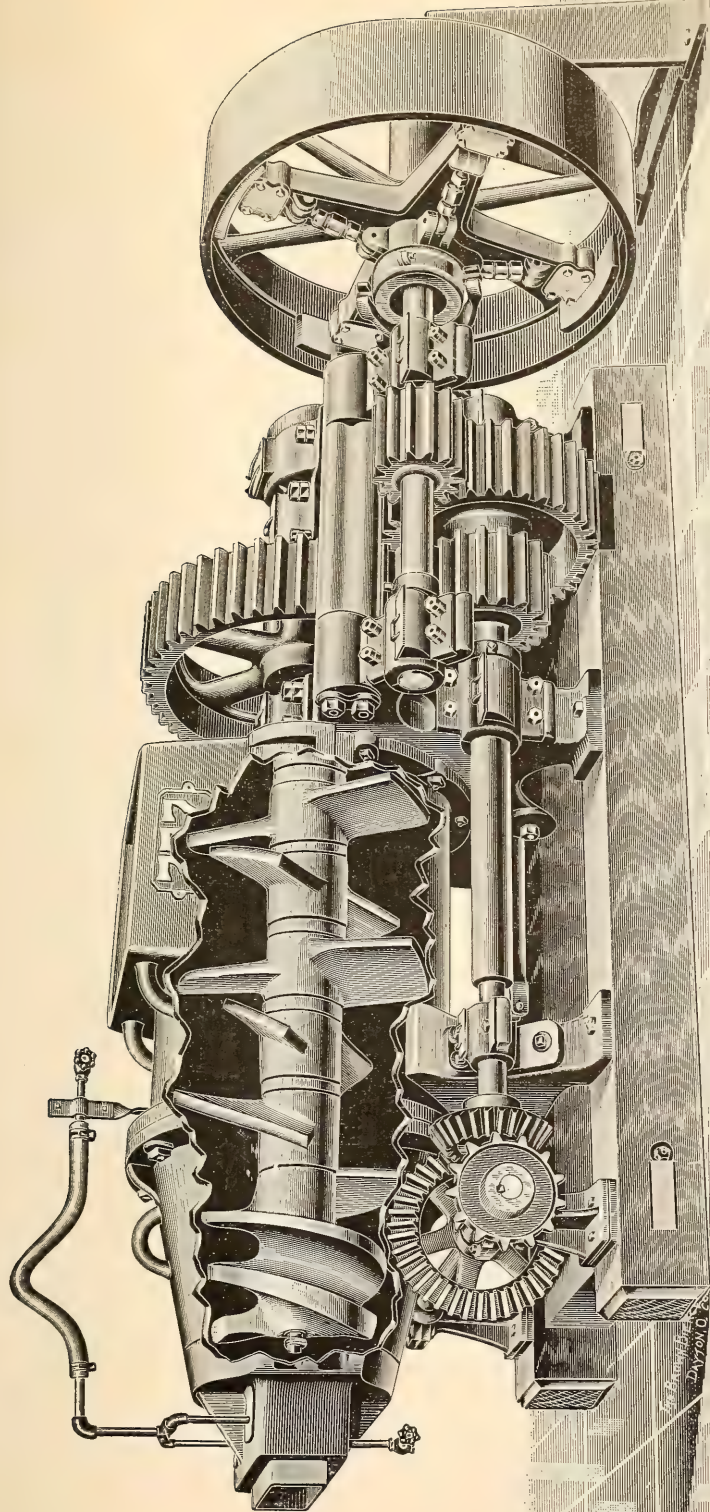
Plate VII.—Raymond Auger Stiff Mud Brick Machine—Sectional View.
